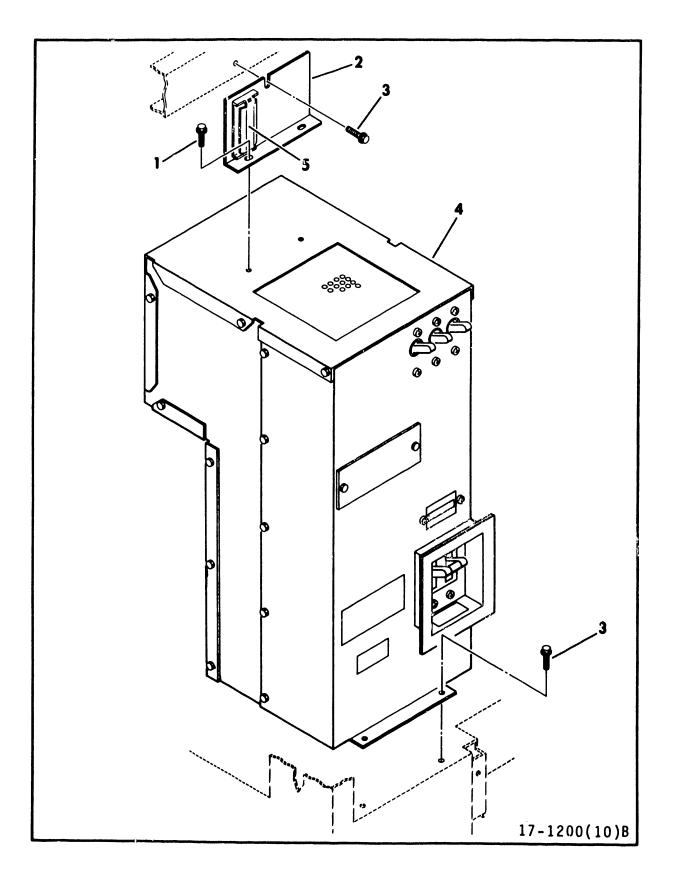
A-12. Frame & Air Assembly (Sheet 12)
